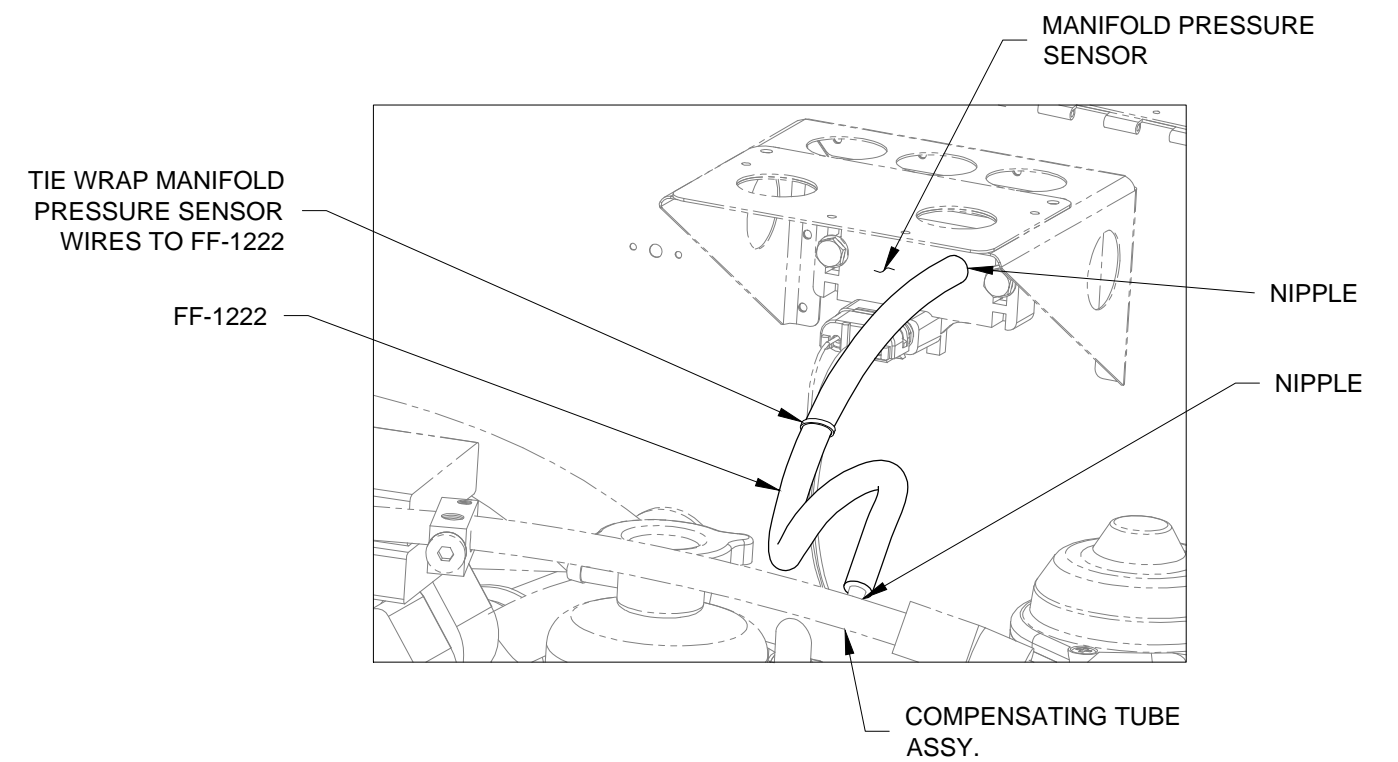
CUT MANIFOLD PRESSURE HOSE
